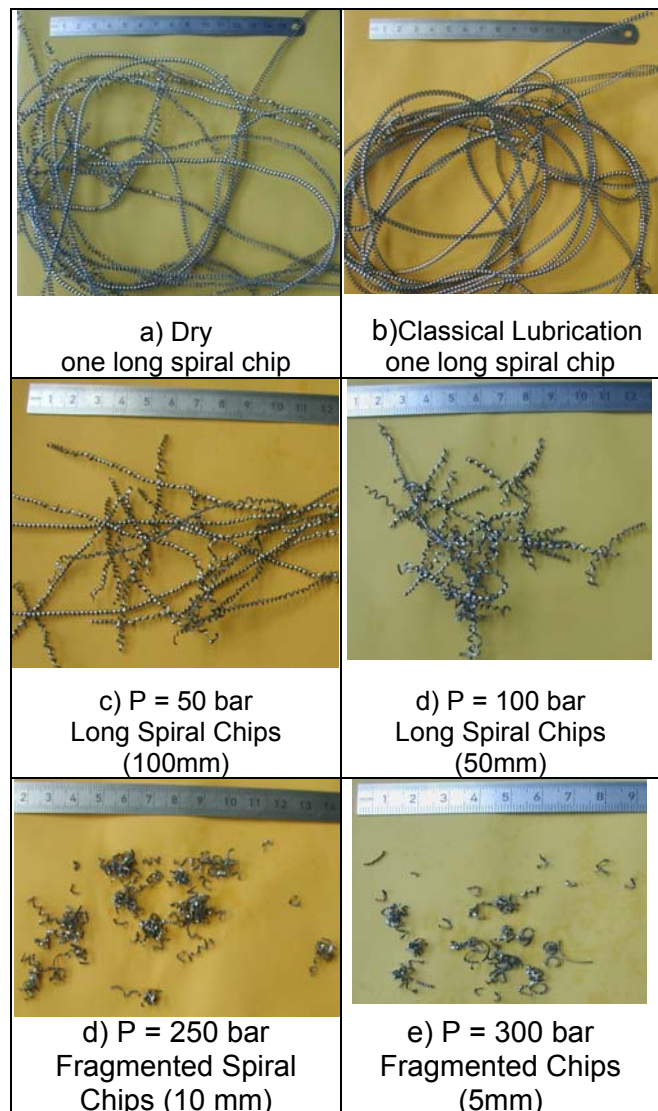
Chip morphology obtained by a) dry machining, b) CL machining and c)-e) HPWJAT
